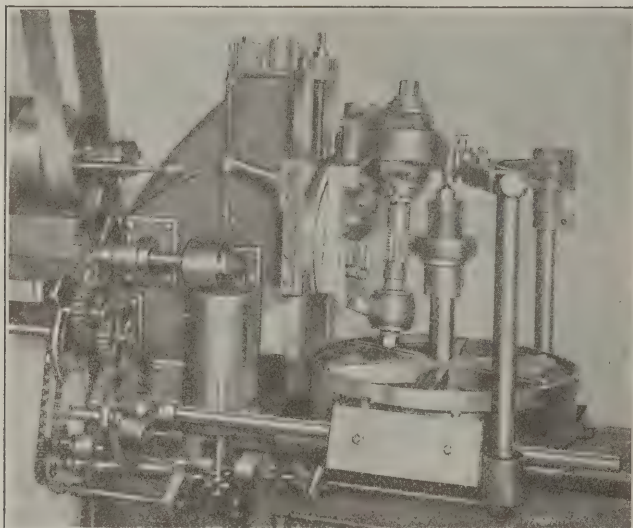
Farwell Machine cutting Spiral Gear having Tooth Angle of over 80 Degrees
